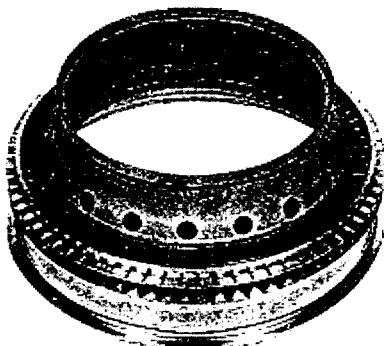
Appearance of brazed compressor blade using Au filler metal
